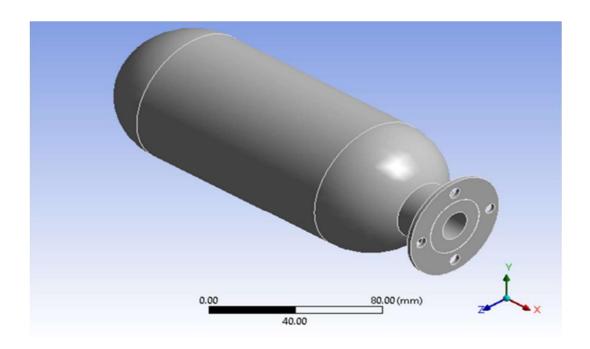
Isometric View of Chamber 16 mm diameter opening
